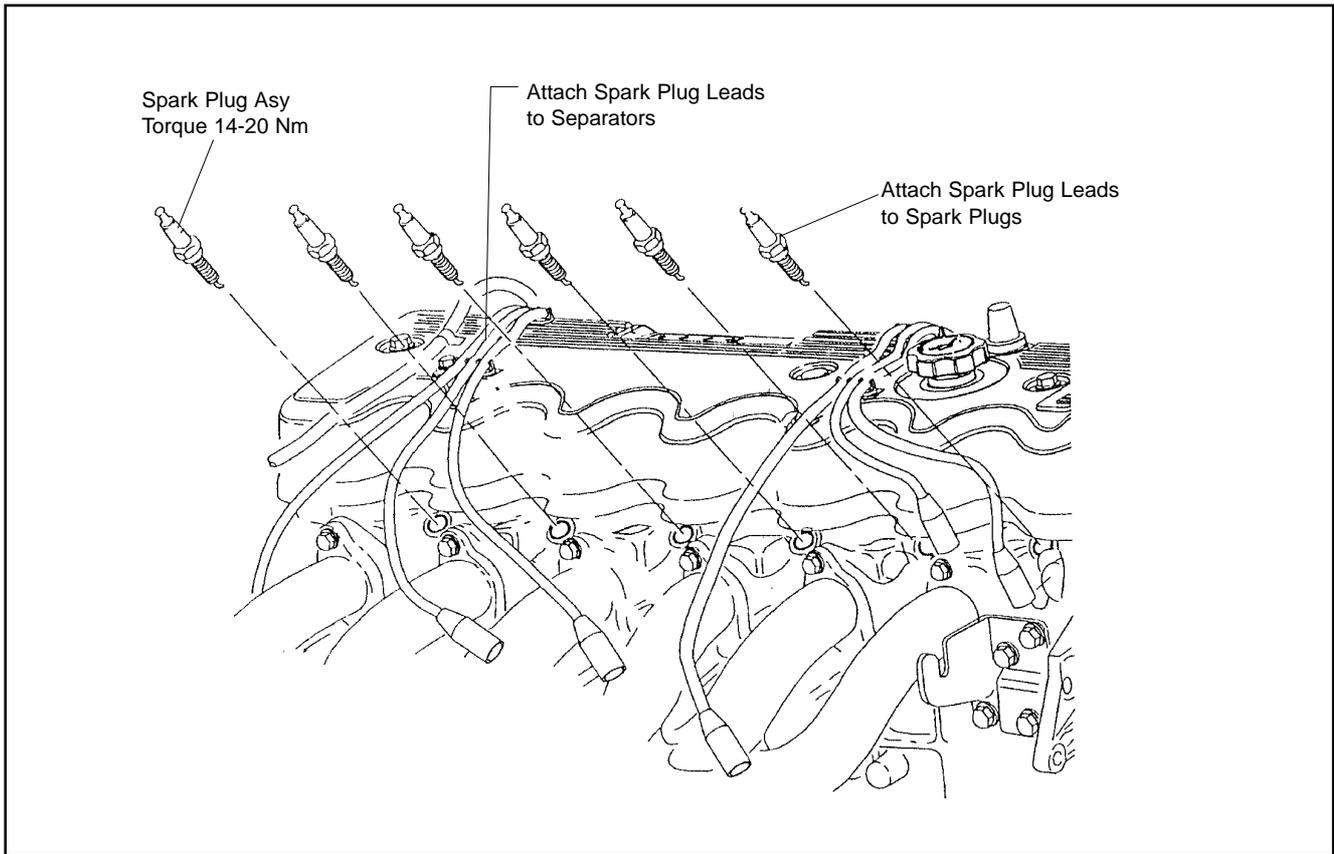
Spark Plug Lead Installation - 6 Cylinder
